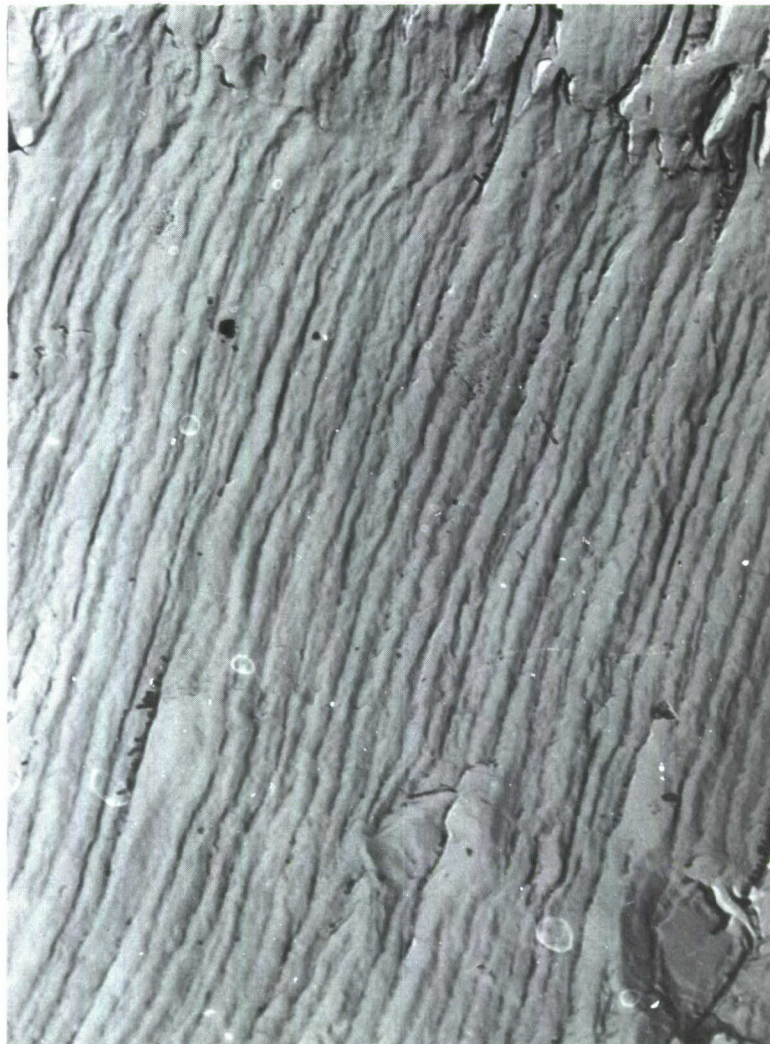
ELECTRON MICROFRACTOGRAPH OF FATIGUE FRACTURED SURFACE —
